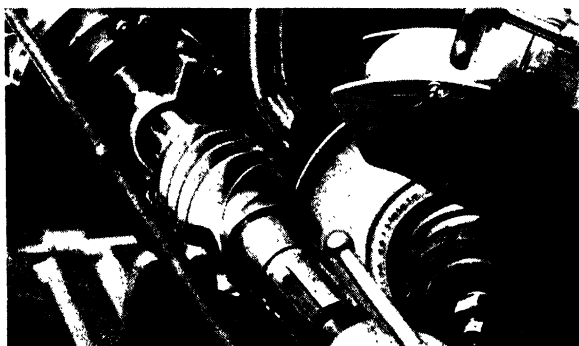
CLOSE-UP VIEW OF WORM-GRINDING IN THE D.B.S. WORKS
